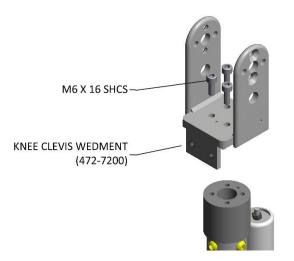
Attach Knee Clevis Weldment with Four M6x16 SHCS
